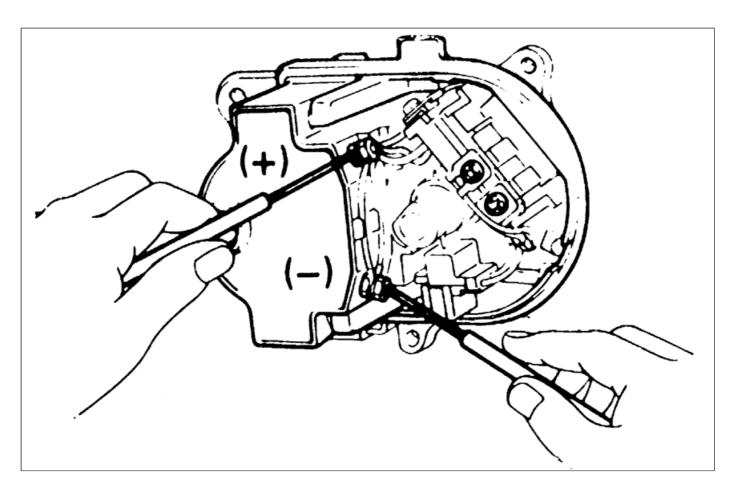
Ignition coil primary resistance check. 2RZ-FE & 3RZ-FE engines
